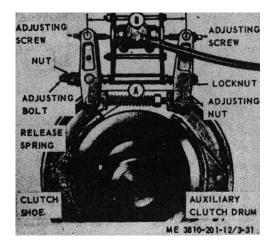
Auxiliary (booster) clutch adjustment points.
